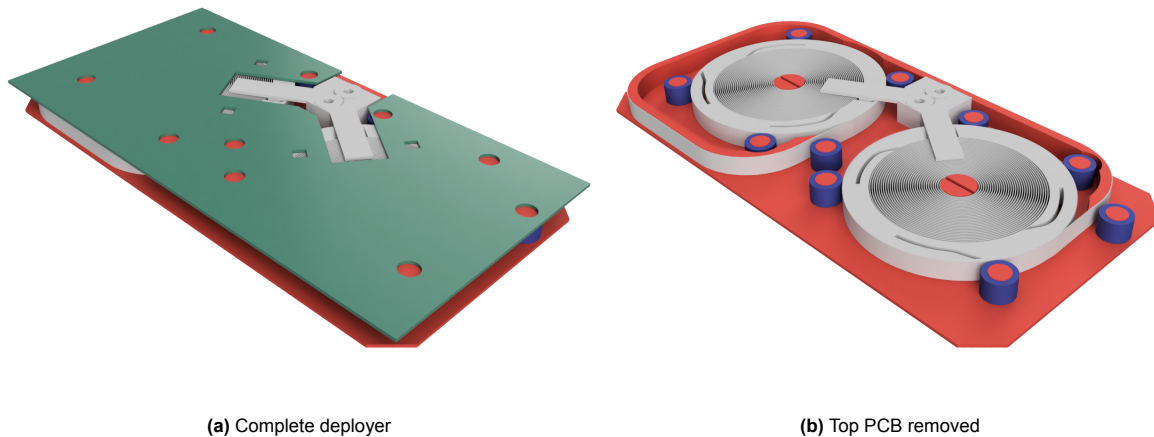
Deployer case assembly components coloured; case bottom in red; case top PCB in green; bushings in blue
